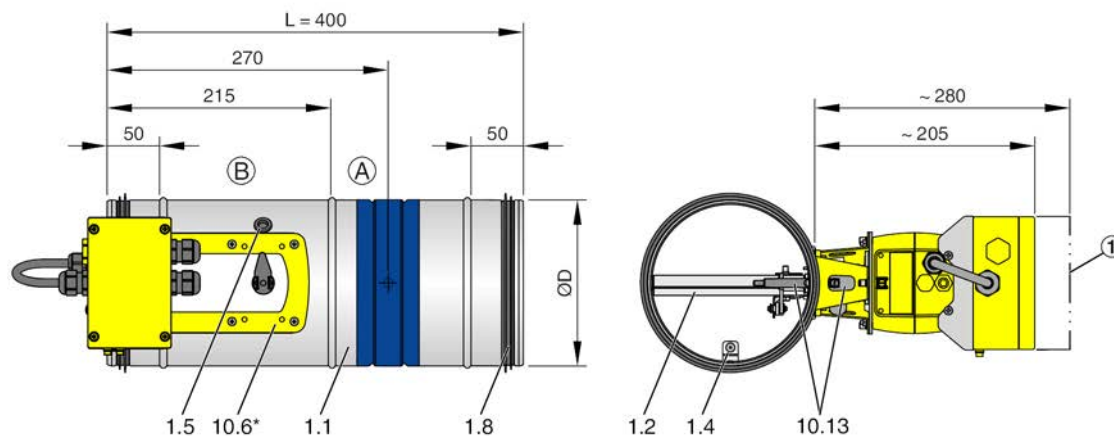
FKRS-EU with explosion-proof spring return actuator
